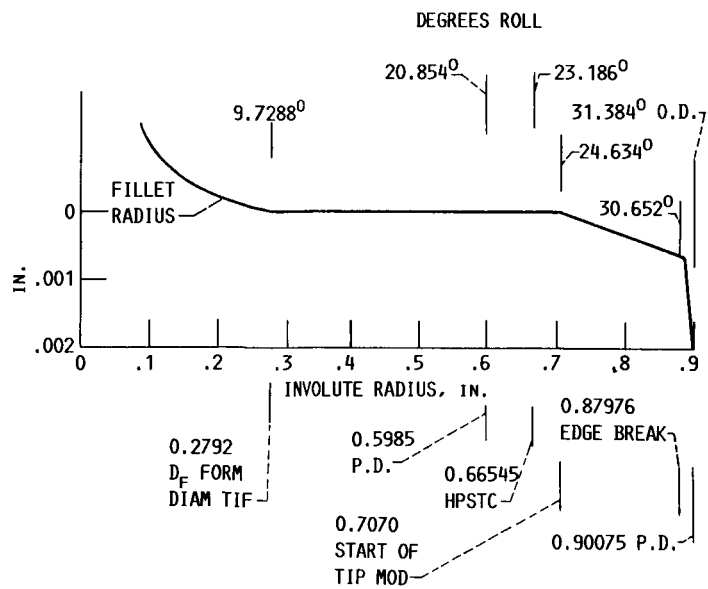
TYPICAL INVOLUTE PROFILE CHART FOR GEAR DRAWING.
